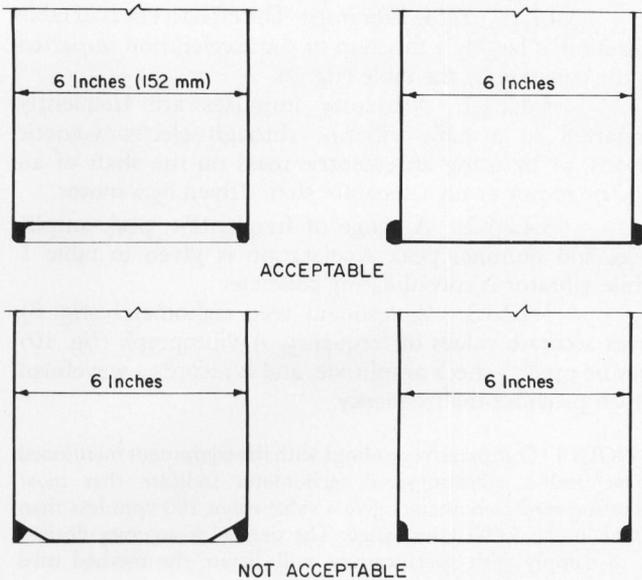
Fabrication details of can bottoms (metal band not shown).
